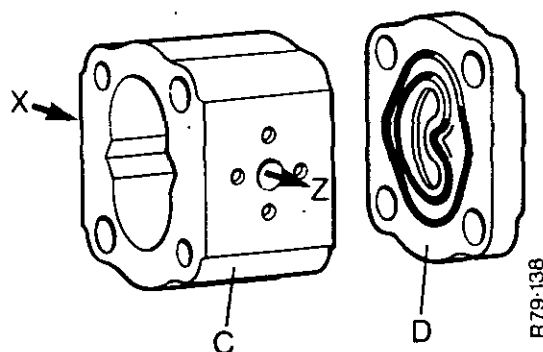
FITTING THE END COVER TO THE PUMP BODY
